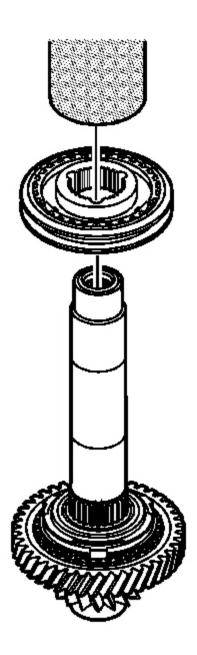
Installing 5th/Reverse Synchronizer Courtesy of GENERAL MOTORS CORP.
